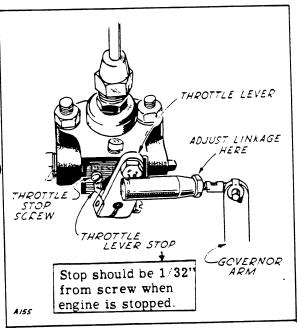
ADJUSTING THE THROTTLE LEVER
